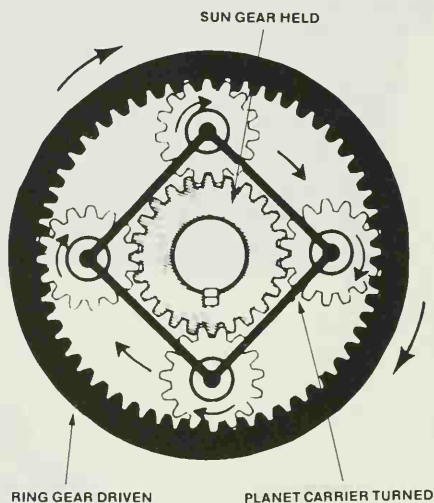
With the planet carrier as input and the sun gear held, the ring gear is driven in overdrive. (Chevrolet Motor Division of General Motors Corporation)
